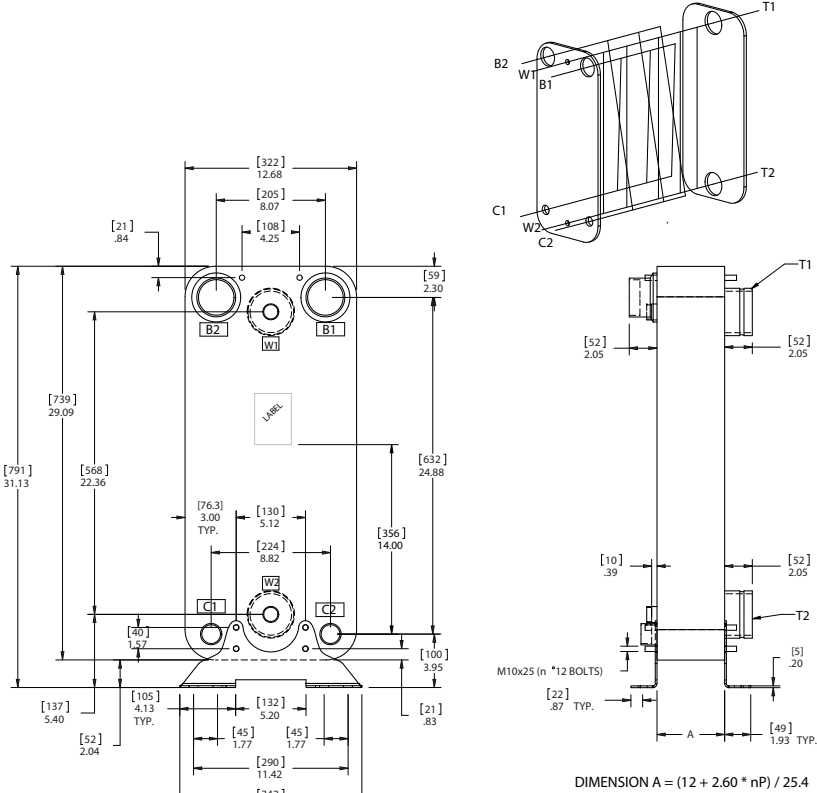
AGZ060D-130D Brazed Plate Evaporator Dimensions
